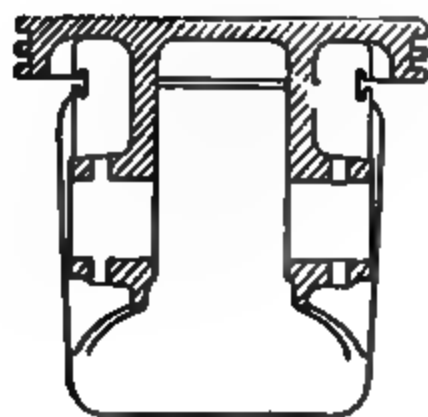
SECTIONAL VIEWS OF THE RICARDO SLIPPER PISTON.
